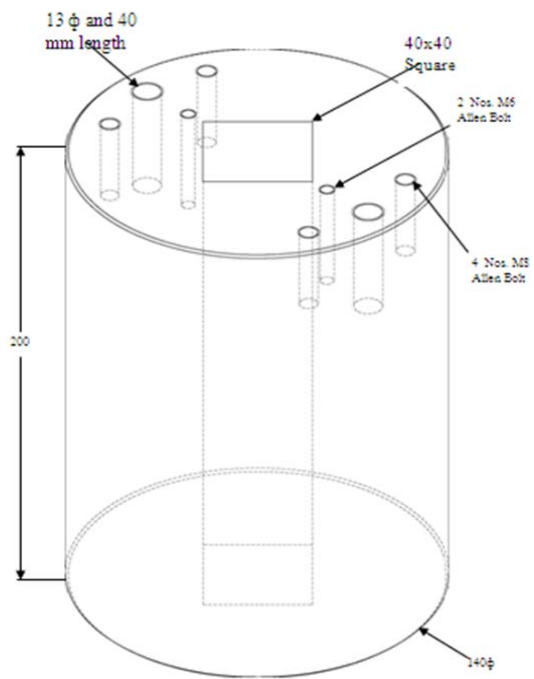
(b) Dimension of the Container with extrusion chamber
